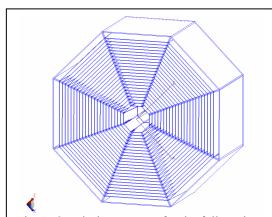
Our design concept for the full grating array unit that will be inserted into the beam. The unit thickness is approximately 8 inches, and the entire array is approximately 18 inches in diameter.
